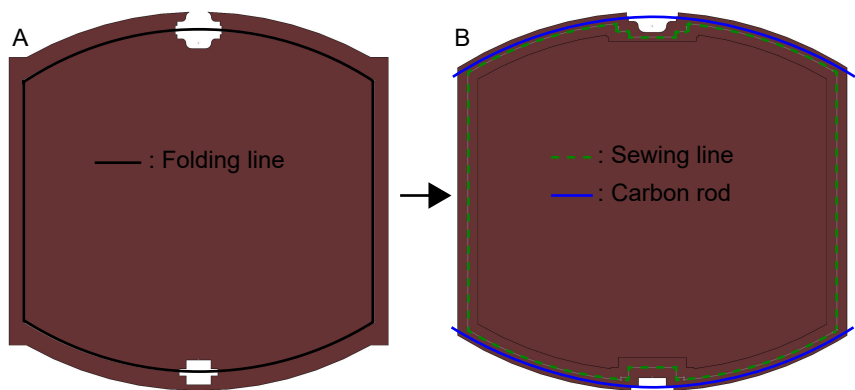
Fabrication process of the membrane. A. Original shape of the membrane cut by a laser cutting machine. B. Final shape after Folding and sewing to produce a space for the carbon rod.
